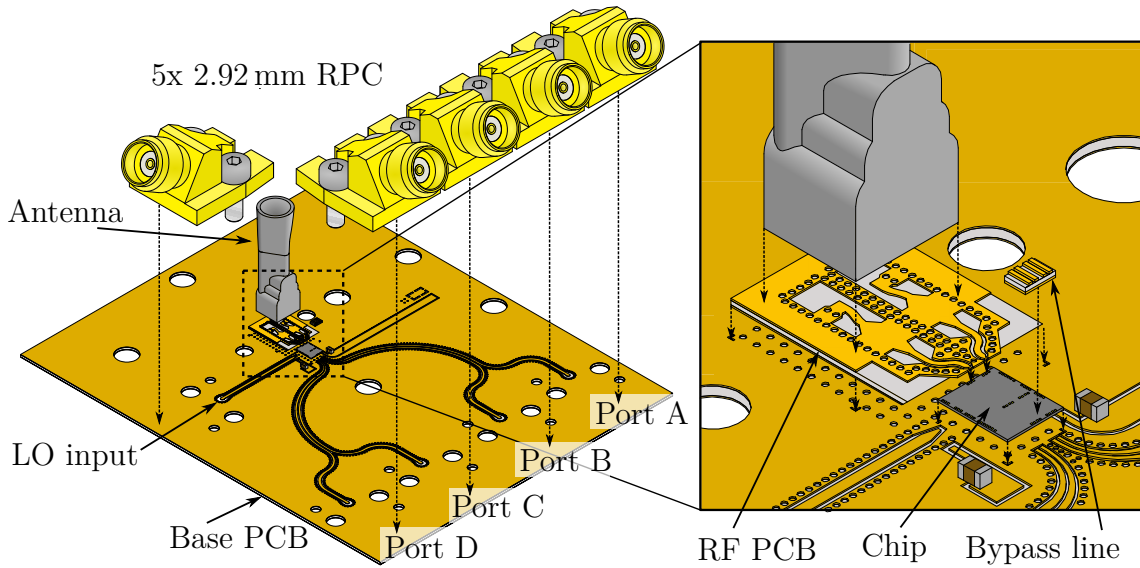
Exploded 3D view of the active single-element receiver, showing details of the antenna base and chip. Not shown is the aluminum plate underneath the base PCB with tapped holes and alignment pins.
